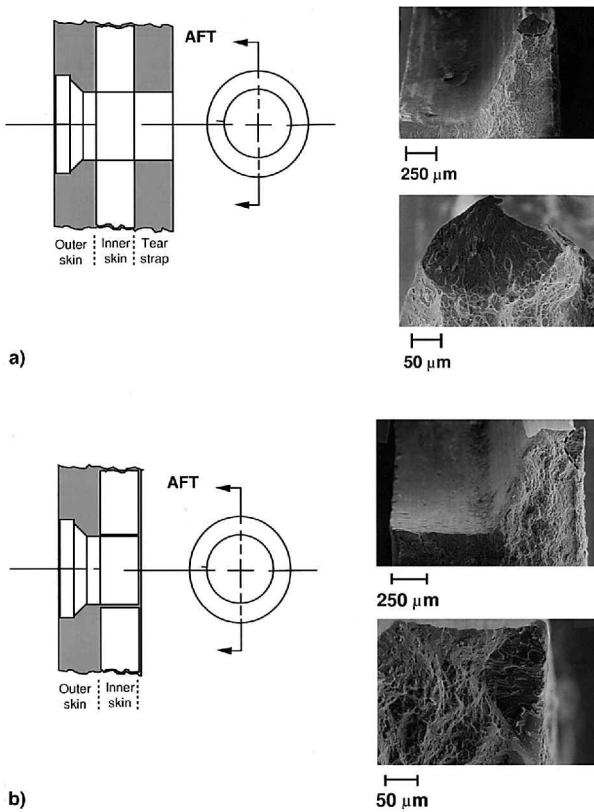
Small fatigue cracks at rivet holes initiated by a) local high stresses and b) fretting.
